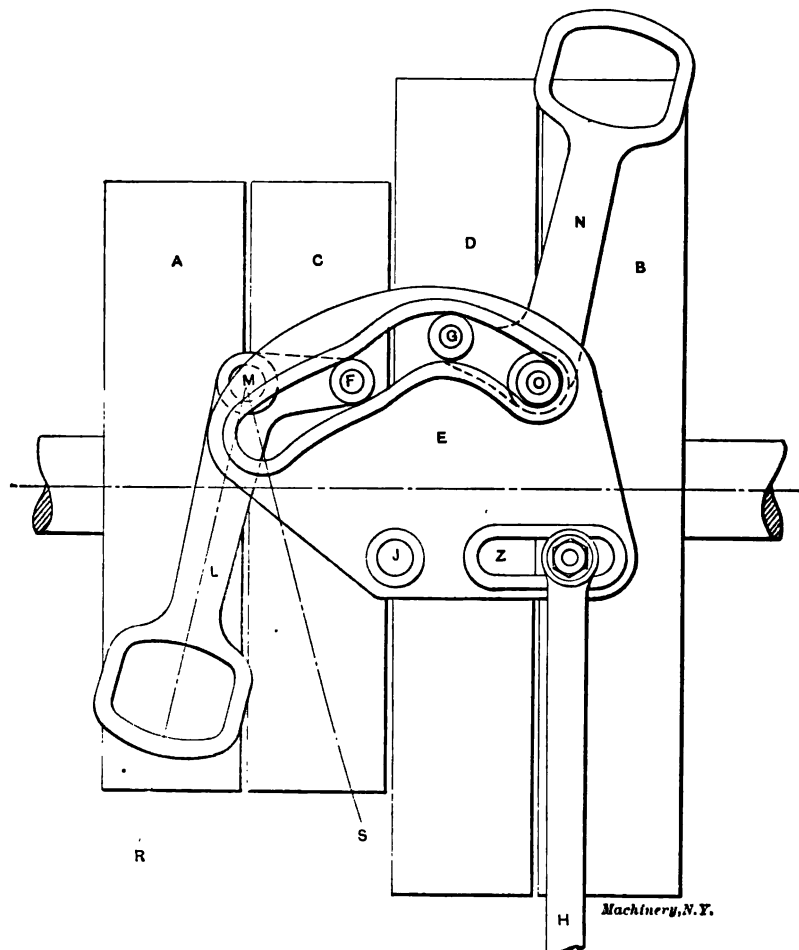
Arrangement for Automatically Shifting Planer Belts.
